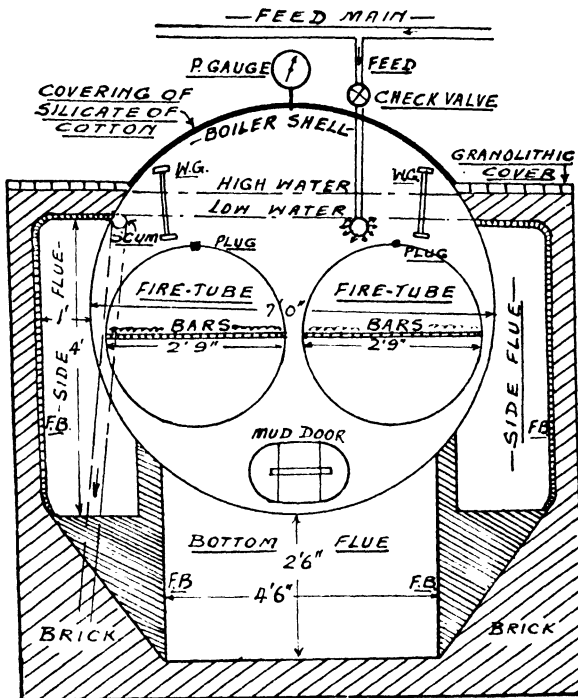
Front Sectional Elevation of Lancashire Boiler.
